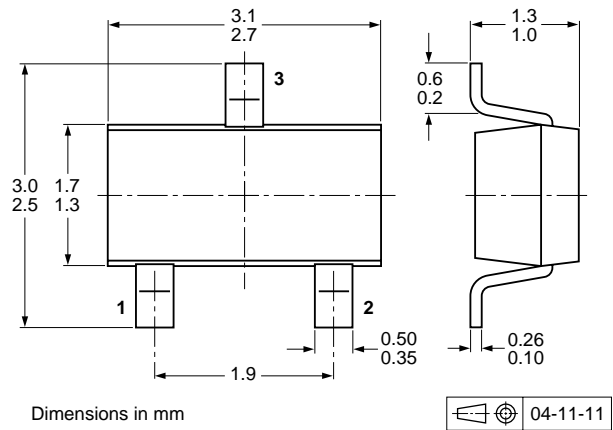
Package outline SOT346 (SC-59A/TO-236)
